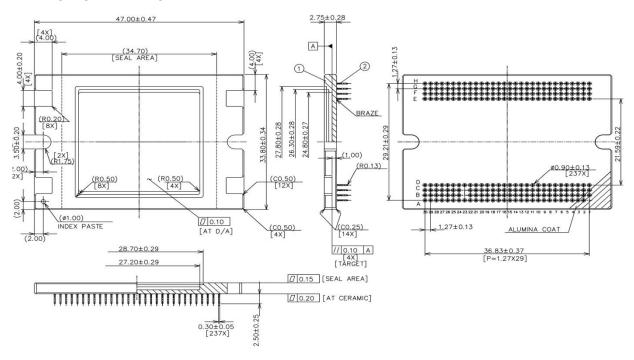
PACKAGE DRAWING OF THE CMV12000, ALL DISTANCES IN MM
